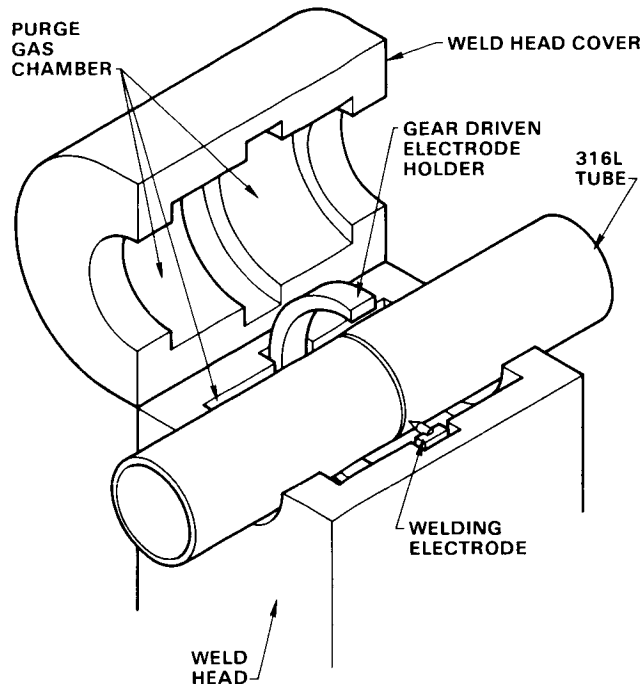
Schematic diagram of in-place tube weld head.
